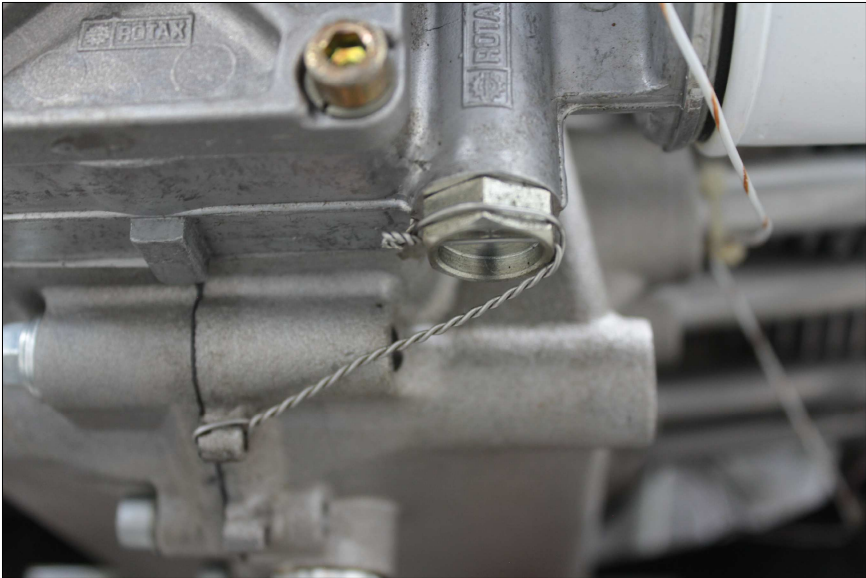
MAGNETIC PLUG LOCATION
